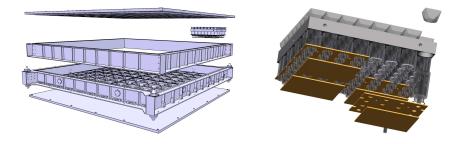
Left : Exploded CAD view of the mechanical architecture of the $120x120 \text{ cm}^2$ counter. Right : CAD view of a $22x22 \text{ cm}^2$ module of 64 PMTs.
